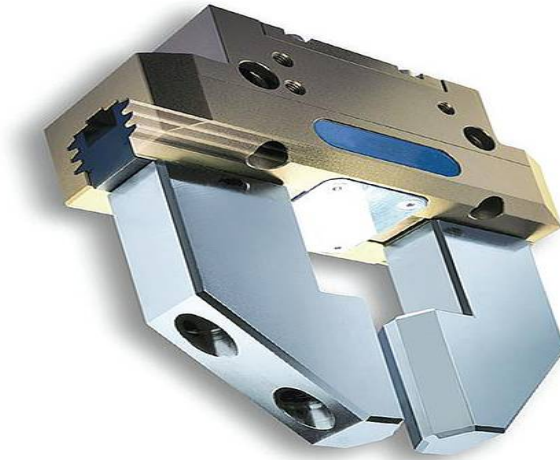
Hydraulic Gripper (Source: <https://www.mobilehydraulicstips.com/wp-content/uploads/2013/09/hydraulic-gripper.jpg>)
